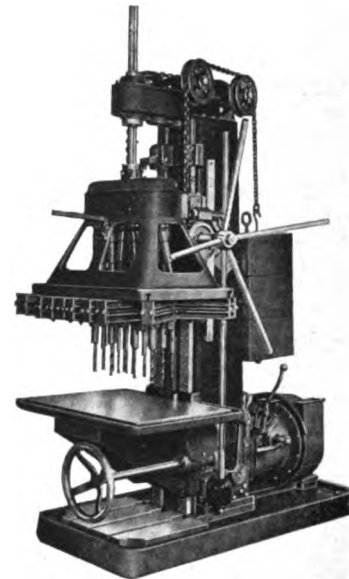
No. 2 Multiple Spindle Drilling Machine
